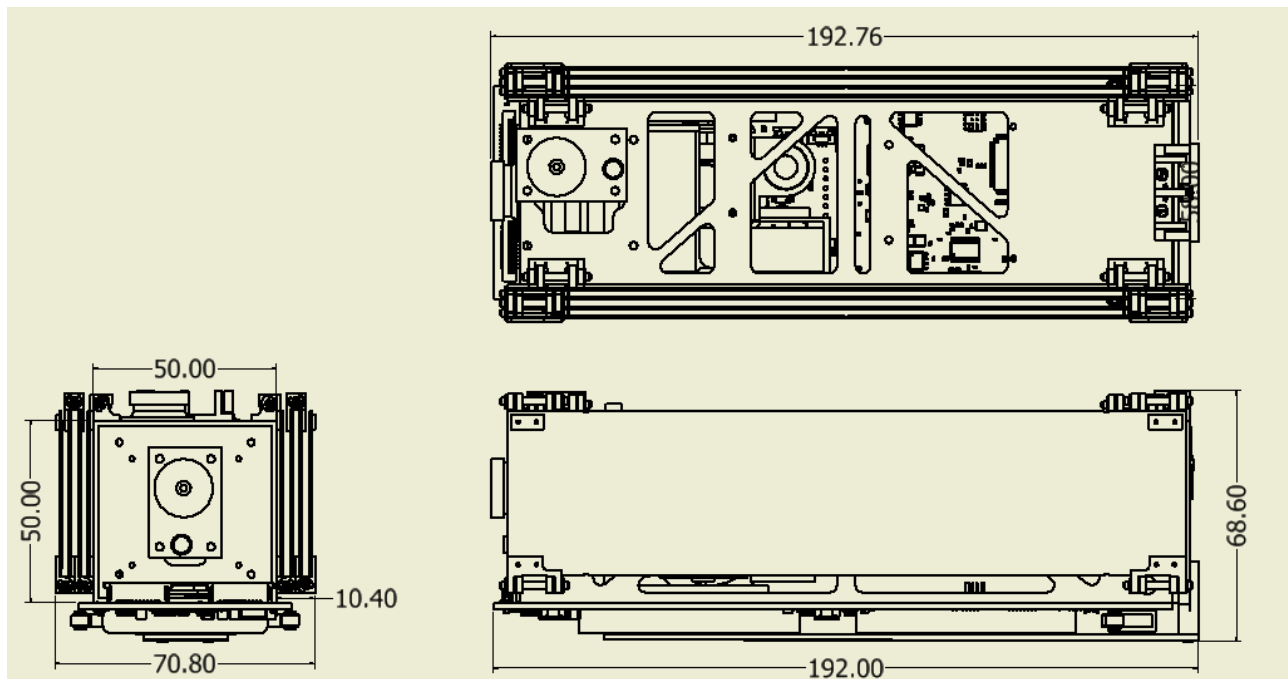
A Noor-1 Unit, Dimension Drawing Solar Panels Stowed
